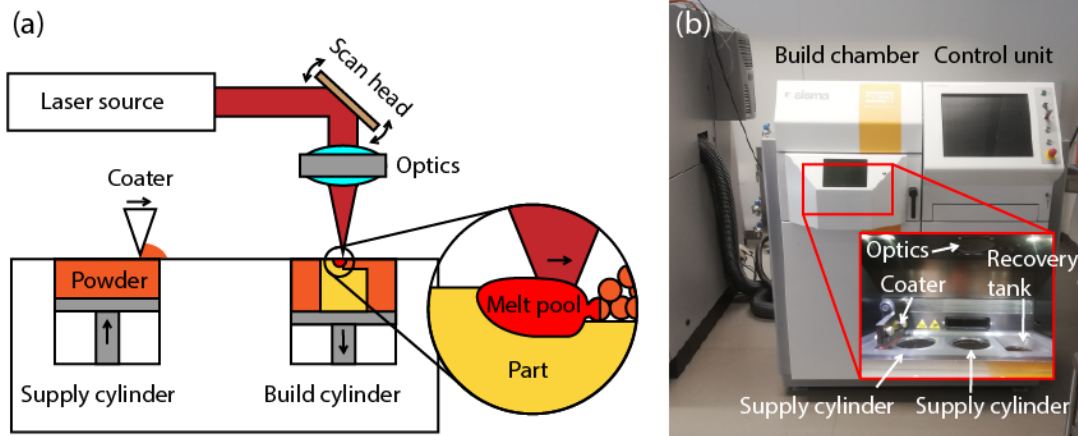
(a) Schematic of a typical LPBF machine. (b) Photograph of a SISMA MySint 100 commercial LPBF machine.
